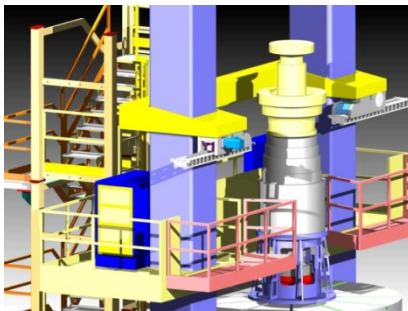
Turbine Rotor welding station using TIG hot wire narrow gap double torch. Mono or multi-pass per layer
